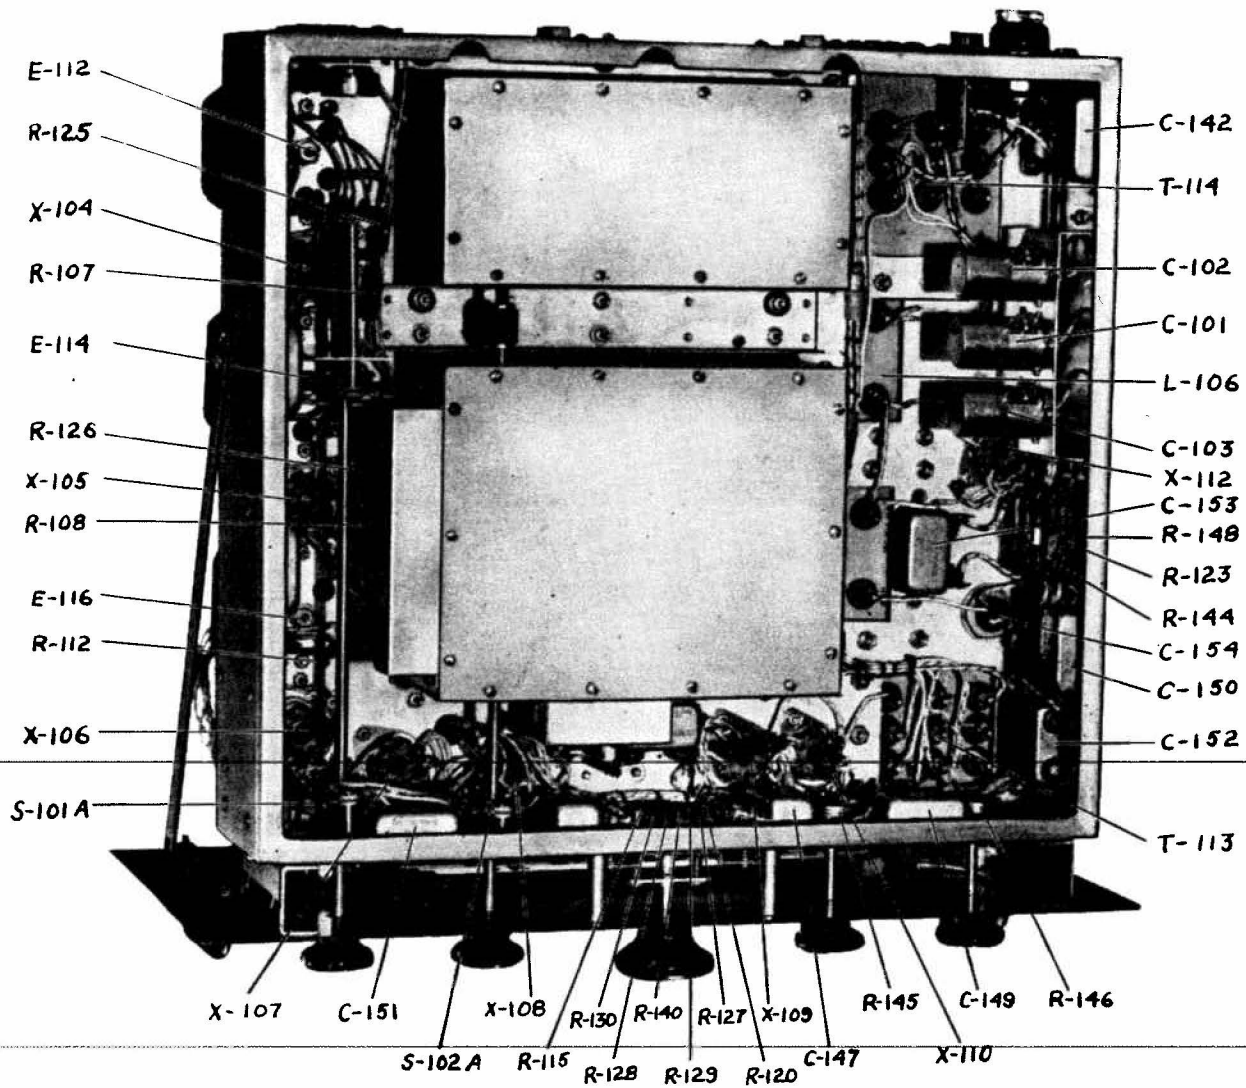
RIGHT BOTTOM OBLIQUE VIEW, RECEIVER CHASSIS, BOTTOM COVER PLATE REMOVED.
